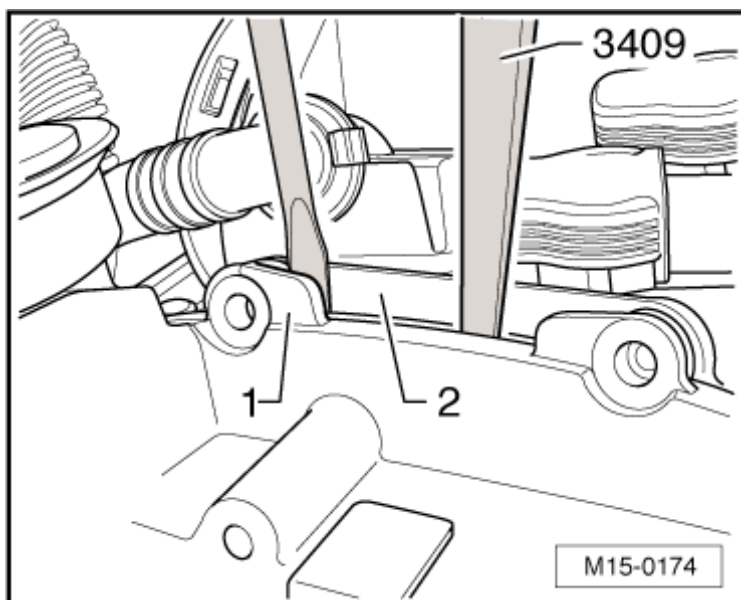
Pressing Off Chain Case Cover Uniformly From Cylinder Head At Top And Bottom Recesses
